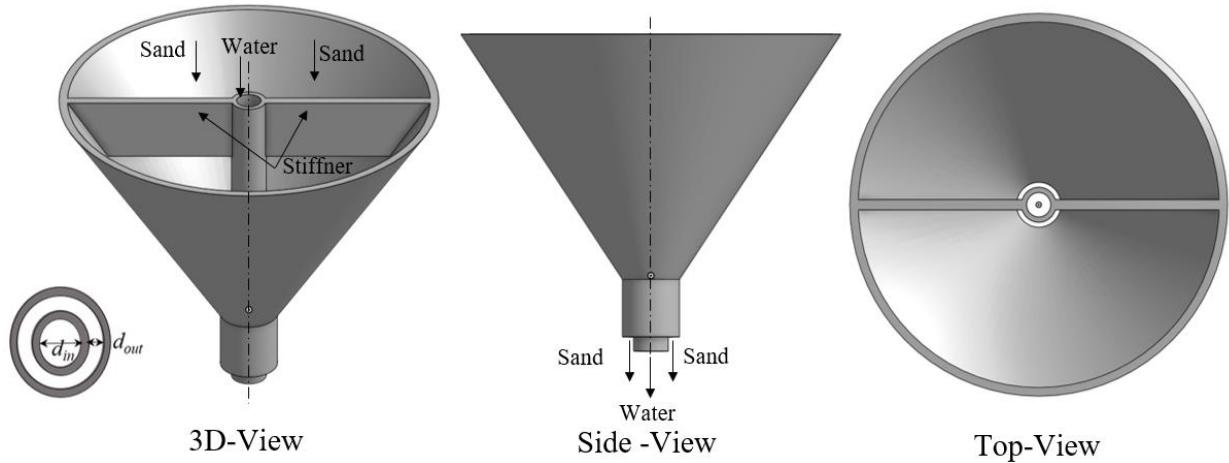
Details of the coaxial nozzle arrangement and funnel-pipe assembly.
